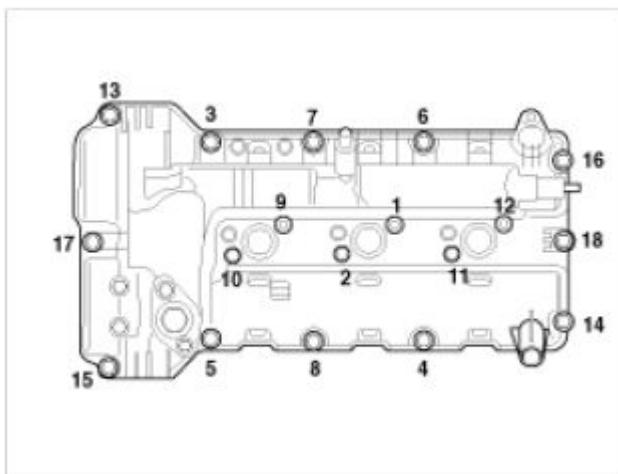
Identifying RH Cylinder Head Cover Mounting Bolts Tightening Sequence
